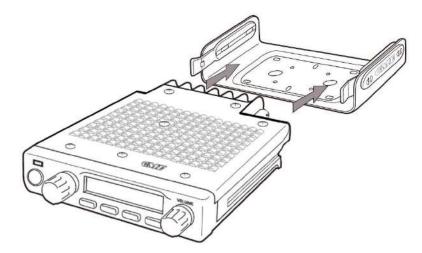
Fitting the CM40/50 Radio in the MB009 Mounting Bracket
